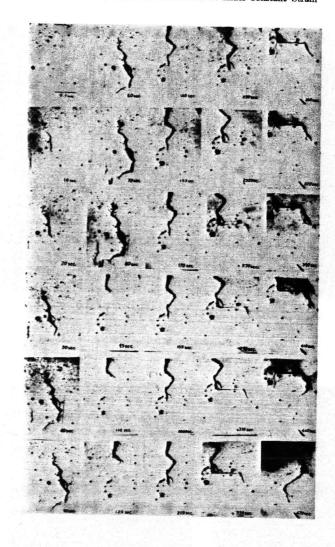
Propagation of cracks in cylinder type restraint SR cracking test specimen.
